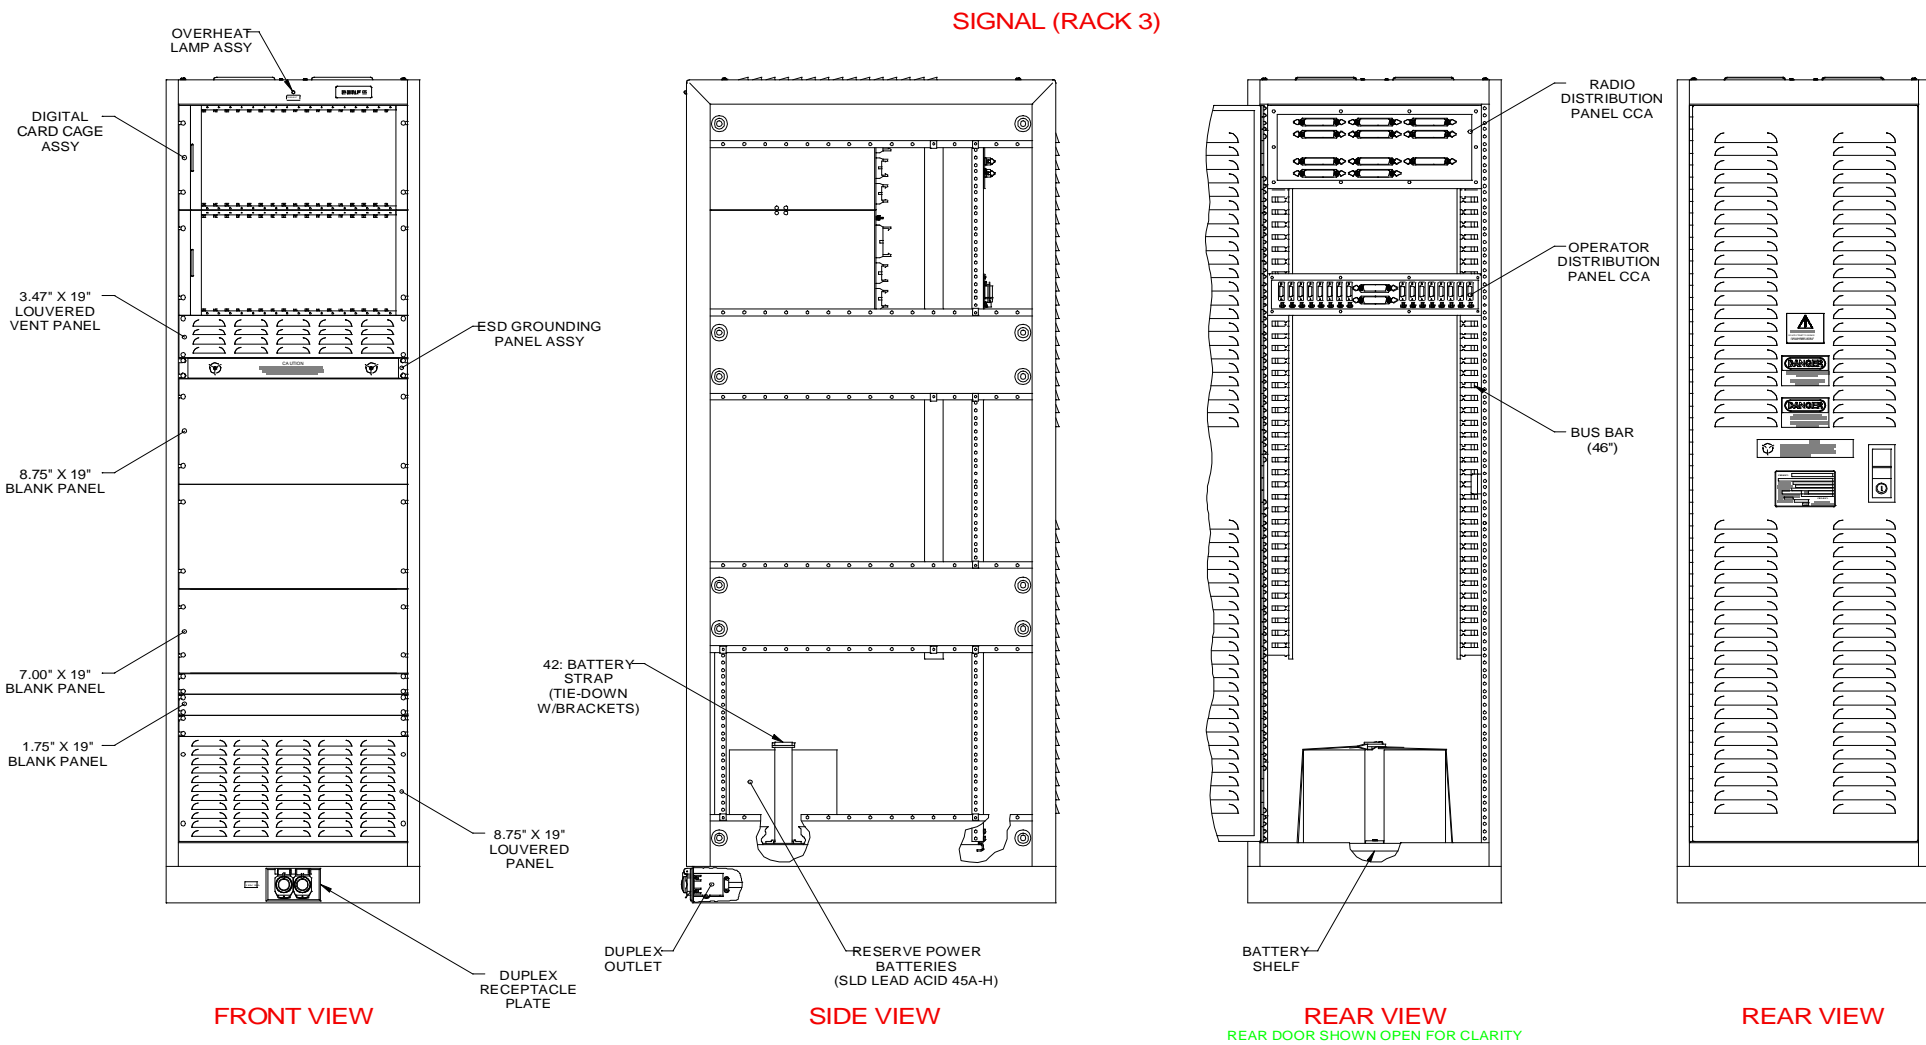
Basic ETVS System 2 (BS-2); Racks 1-3; Front, Side, and Rear Views (Sheet 3 of 3)
